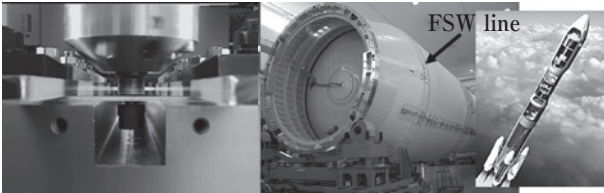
Hollow construction by the self-reacting FSW technology for a H-IIB rocket fuel tank.
